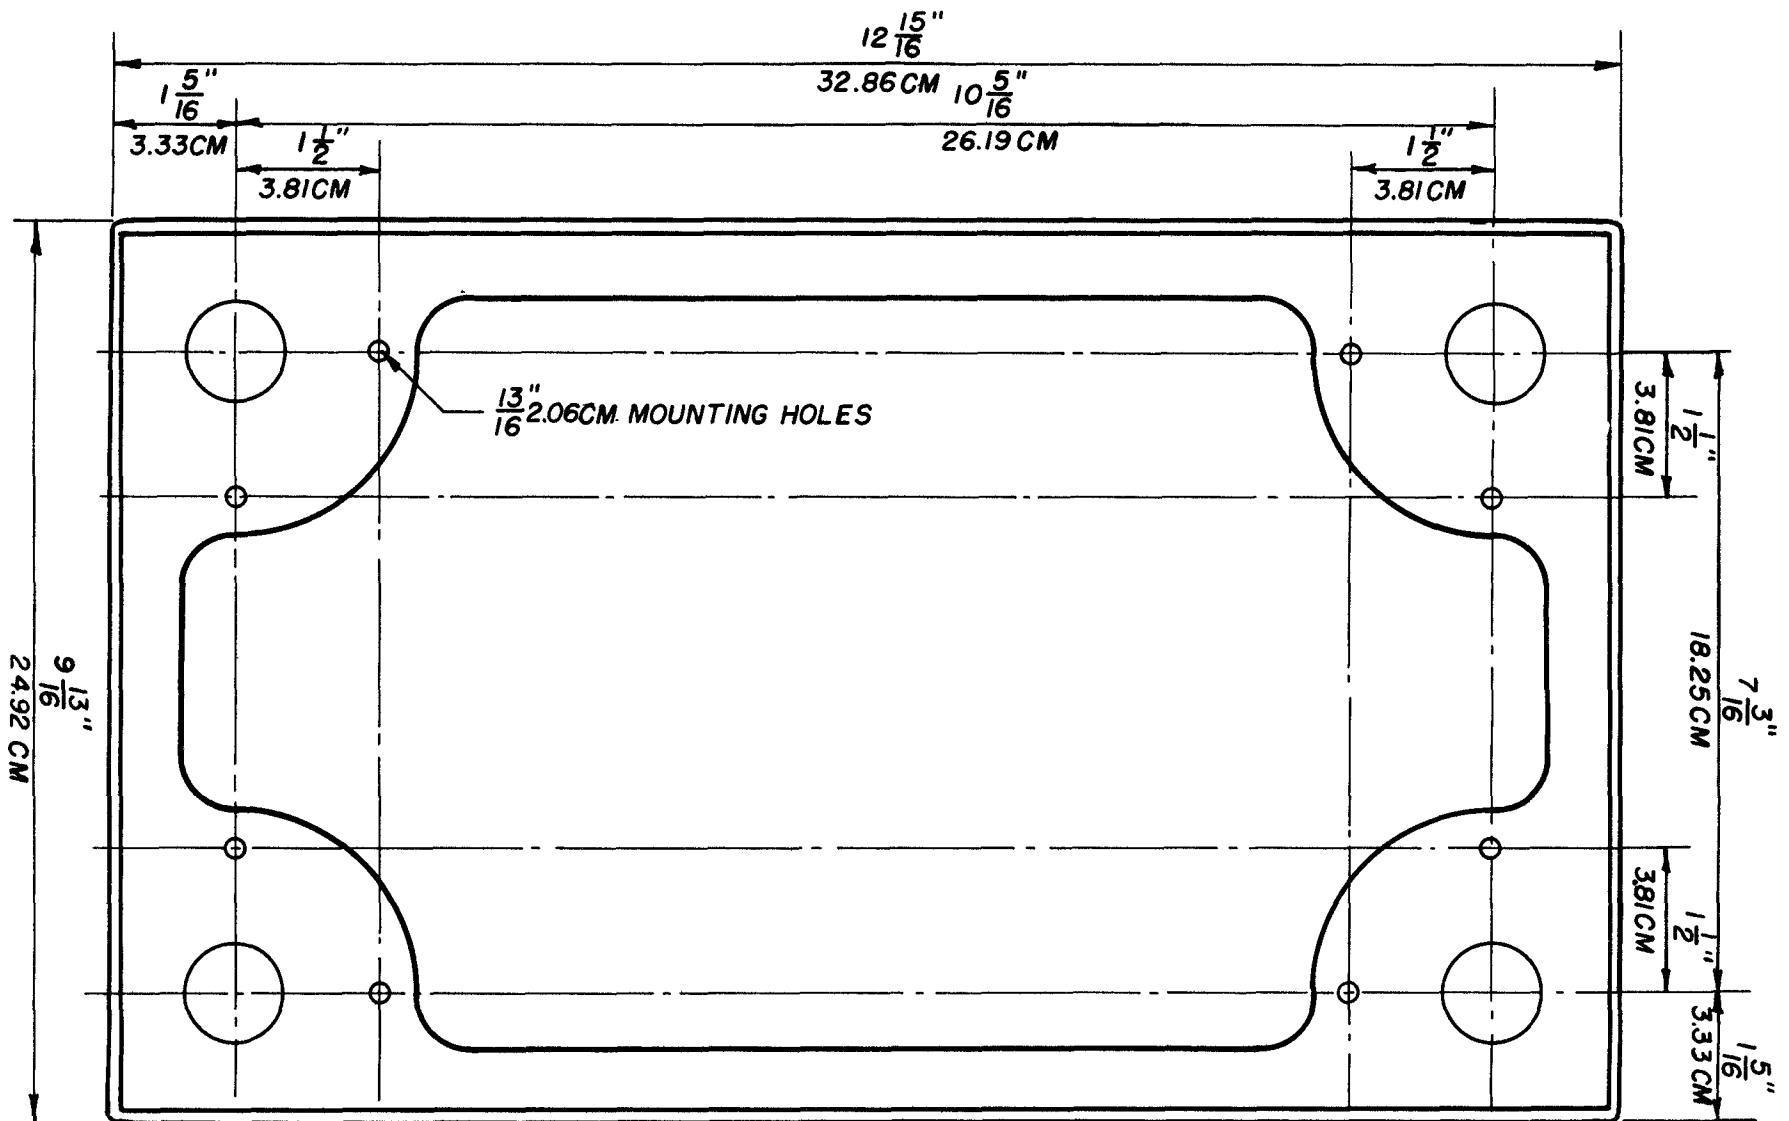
TYPE MR-38A SHOCK MOUNTING OUTLINE DRAWING
